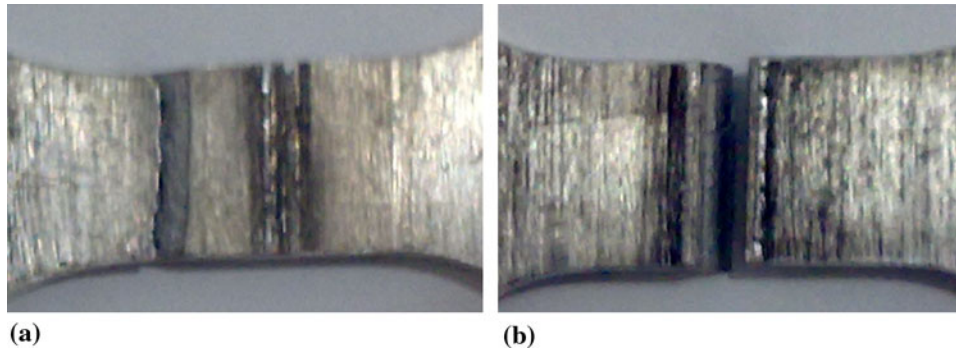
Macrographs of the fracture path of the FSW tensile specimens. (a) Tensile fracture at the retreating side and (b) tensile fracture through the weld nugget (weld line)
